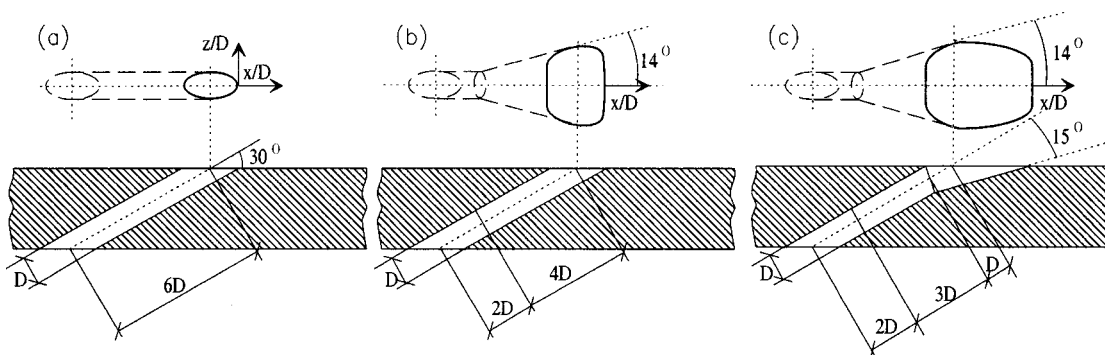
(a) Cylindrical, (b) fan-shaped, and (c) laid-back fan-shaped film-cooling hole geometries
